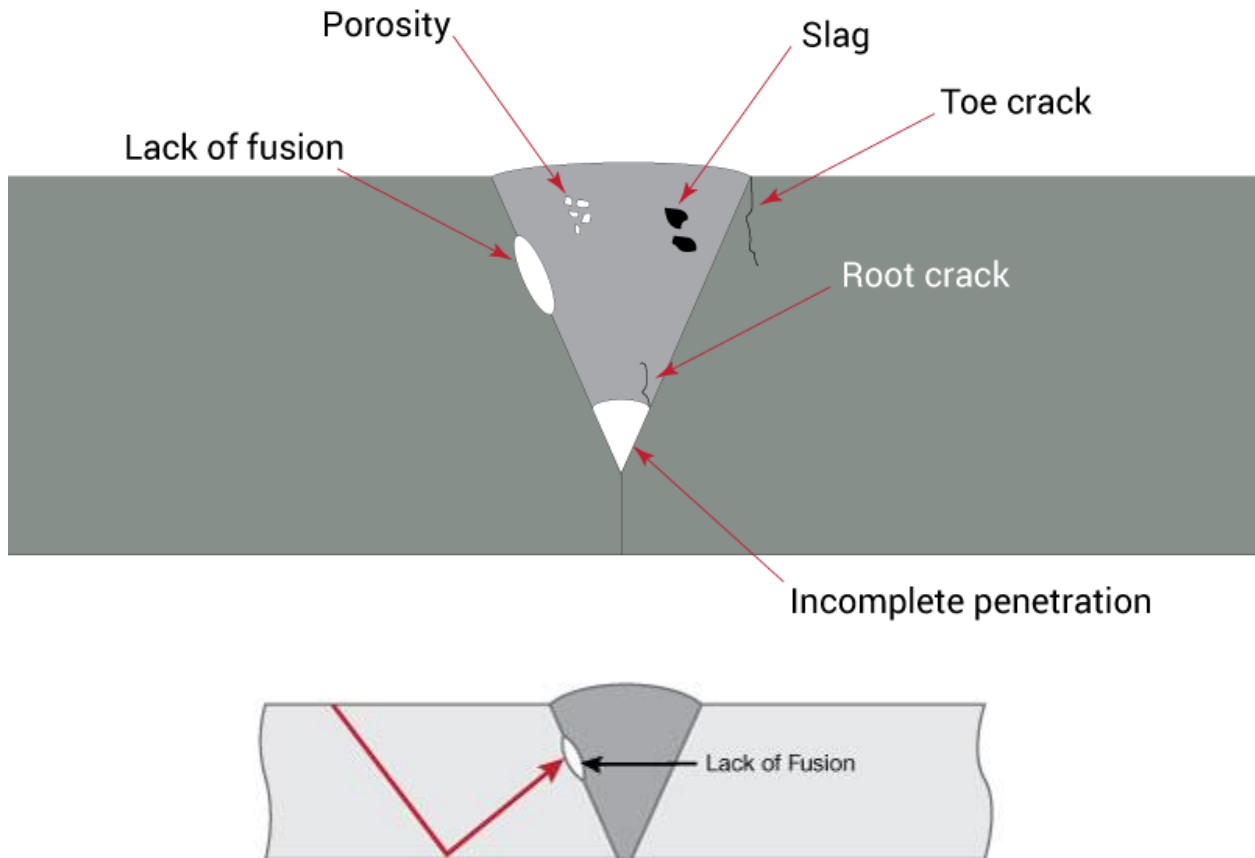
Sections Showing Lacks of Fusion and Incomplete Penetration (Desia, 2010)
